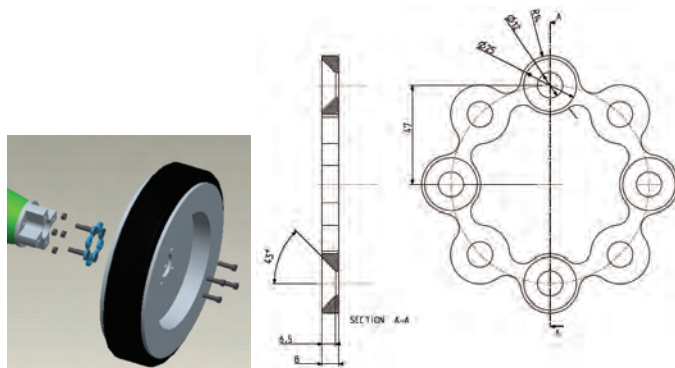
Assembly of wheel, breakable ring and flange and technical drawing of breakable ring
